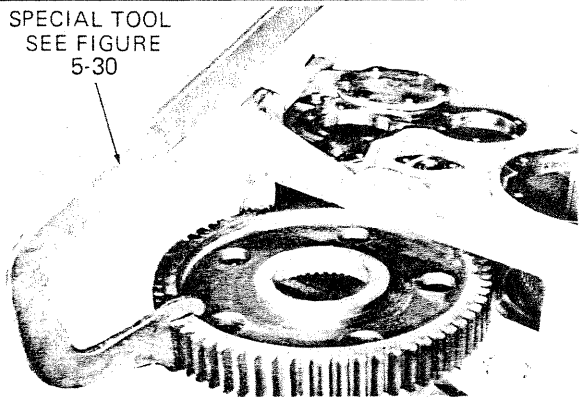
INSTALLATION OF DRUM AND DRUM SHAFT (Sheet 1 of 3)
